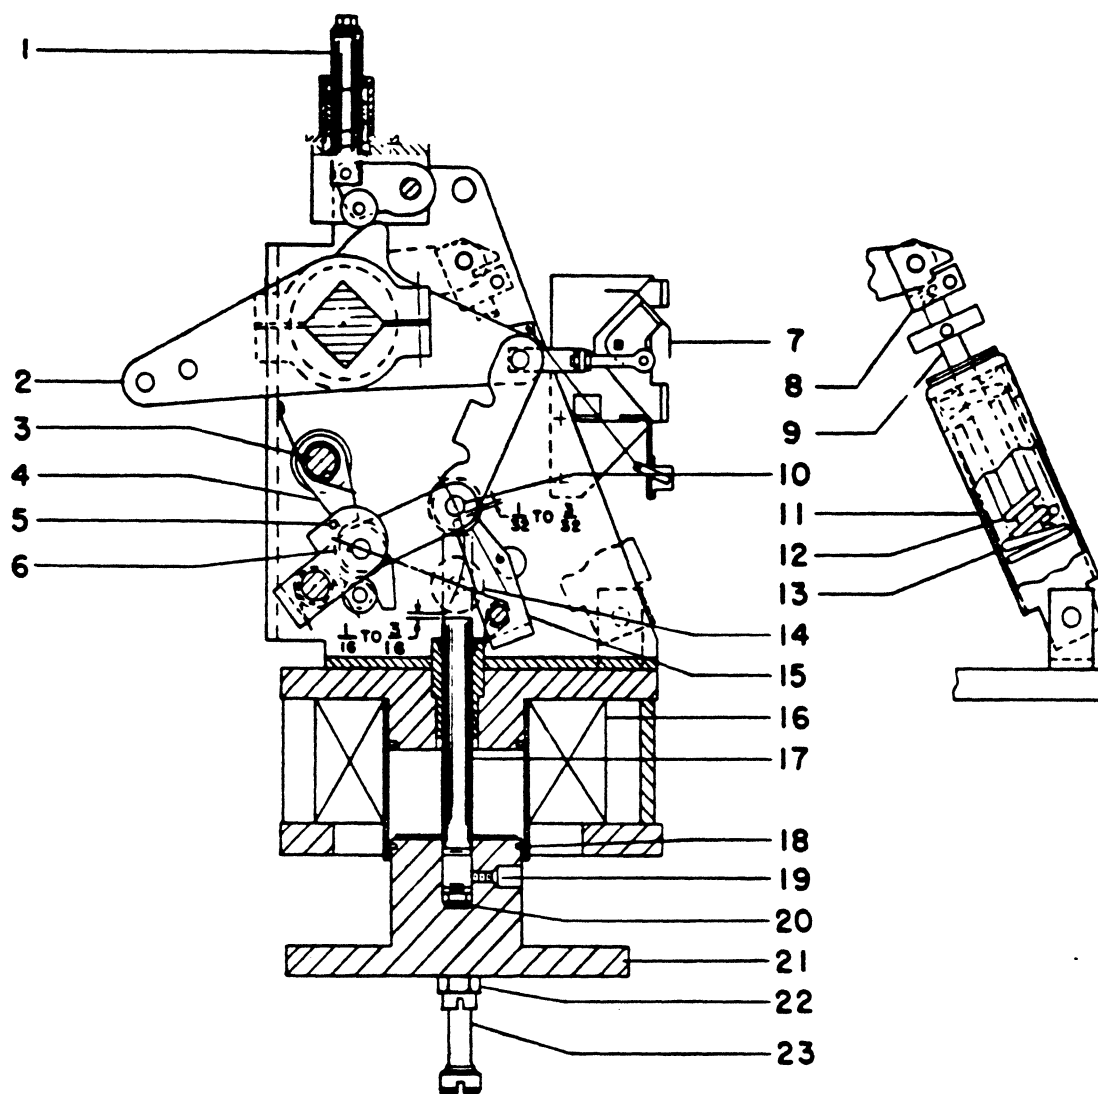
Adjustable Coupling for Making Primary Contact Wipe Adjustment
